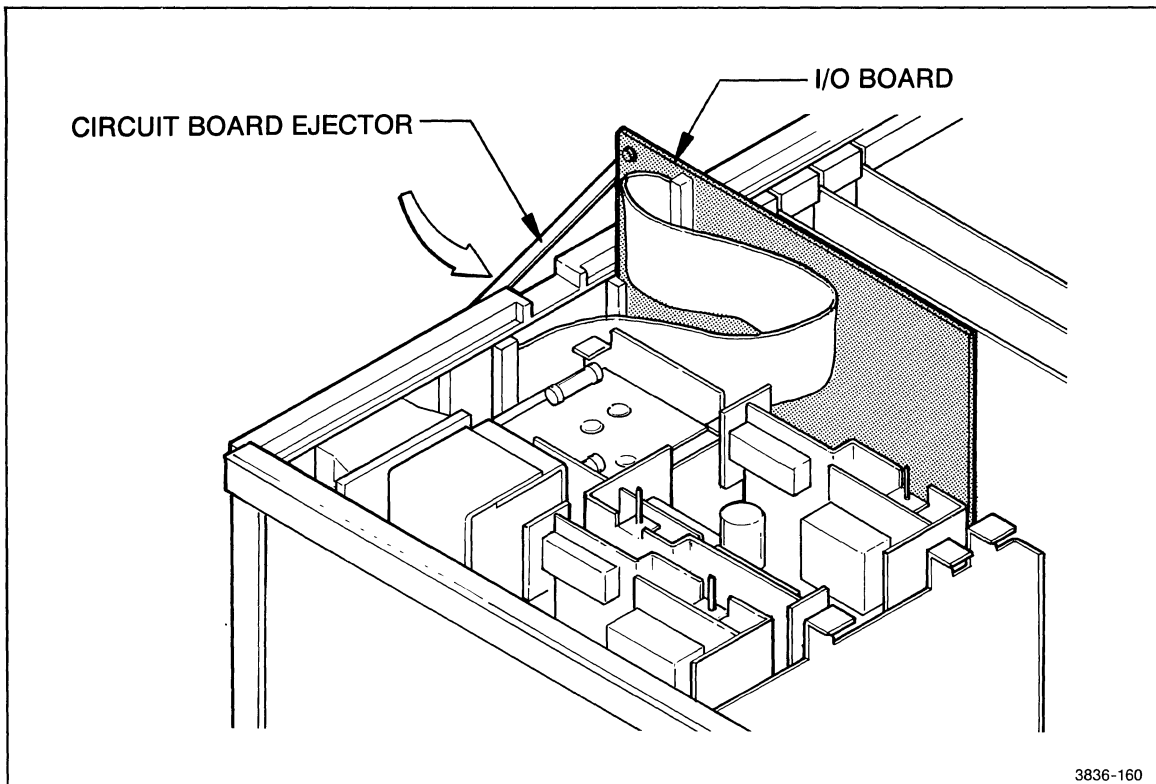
Removing the I/O board. (This figure shows the Monochrome DAS. The Color DAS is similar.)
